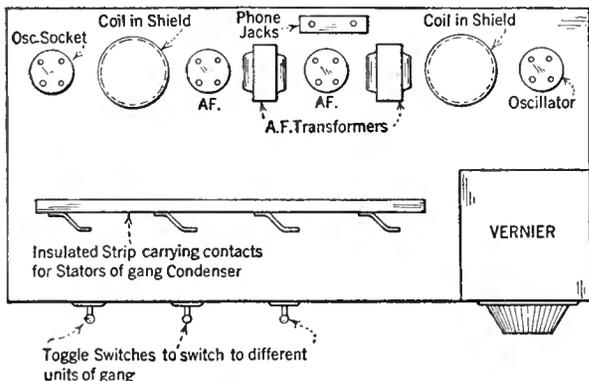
Suggested layout for oscillator of type shown in Fig. 1
